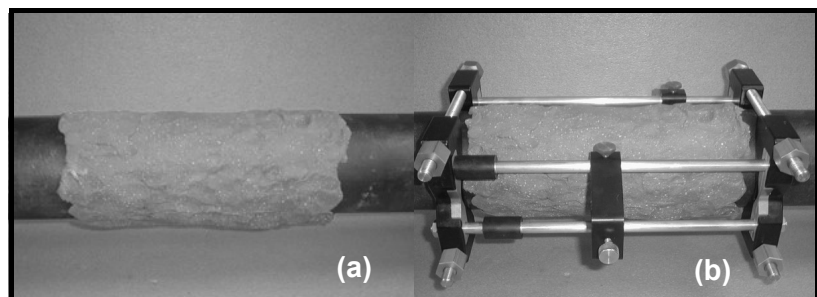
Spreading DMP-3 (a) and Reinstalling the Fixture (b)
